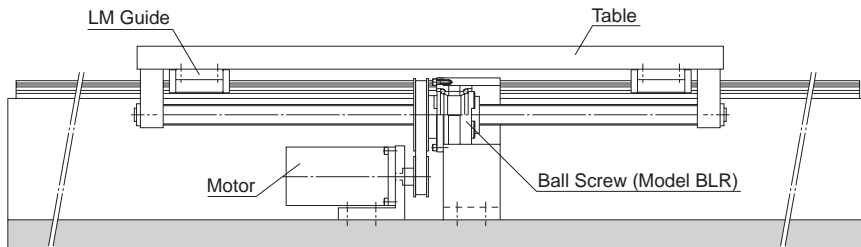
Example of Installation on the Table (Ball Screw Nut Fixed)
